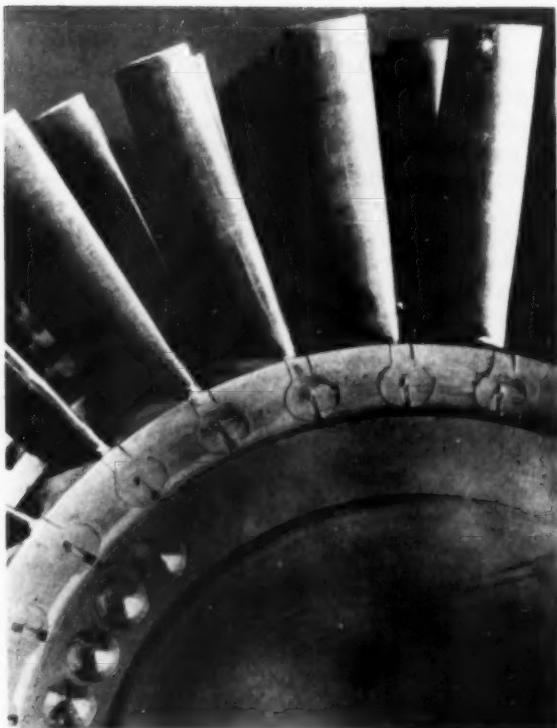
Compressor Disk With Keyed-in Blades for a Westinghouse 19B Jet Engine
